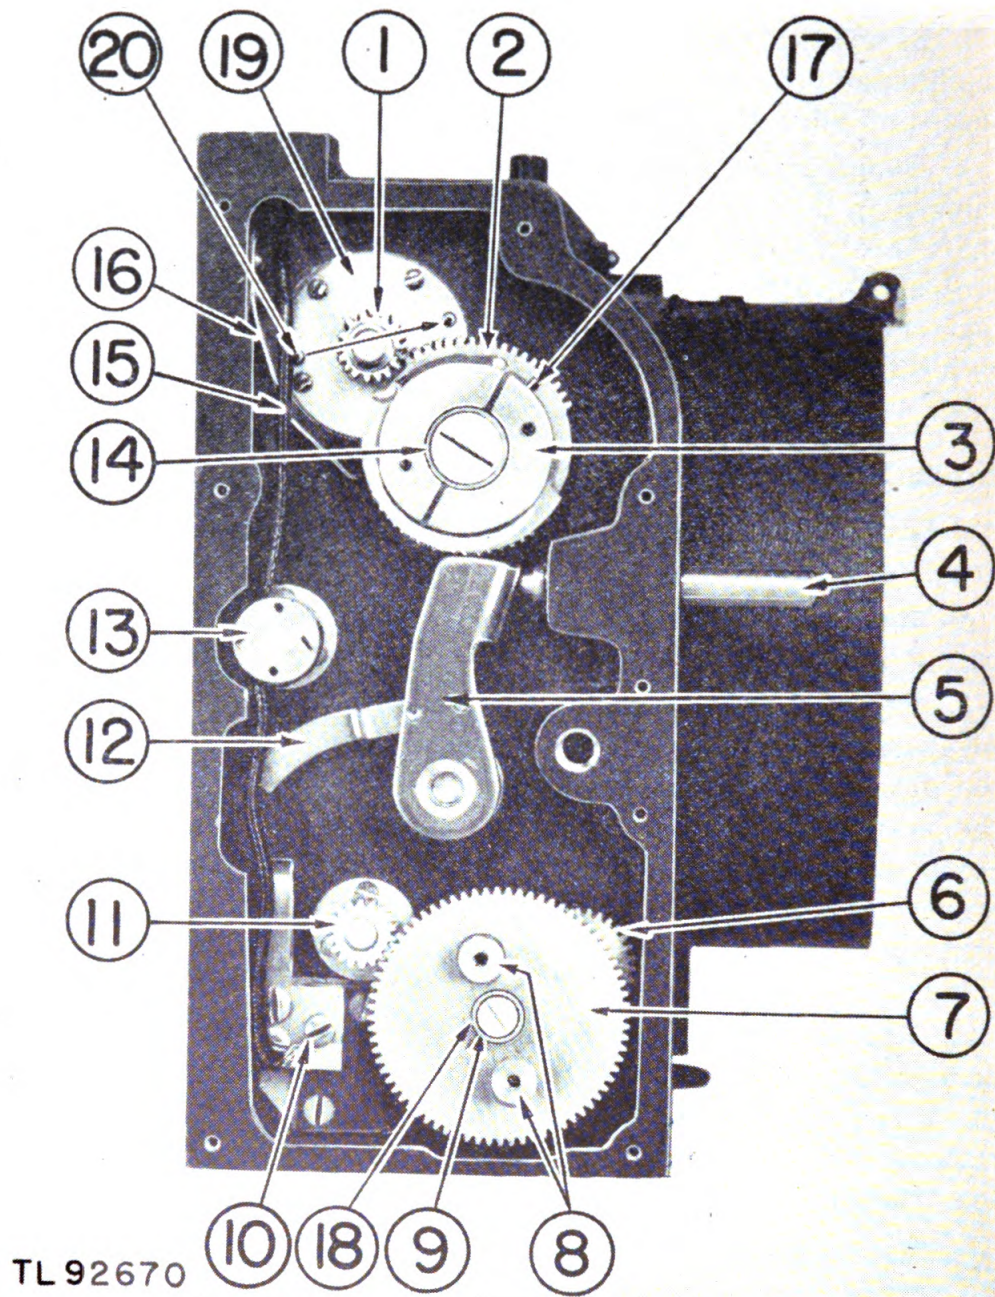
Camera PH-501/PF, right-side view, plate removed.
